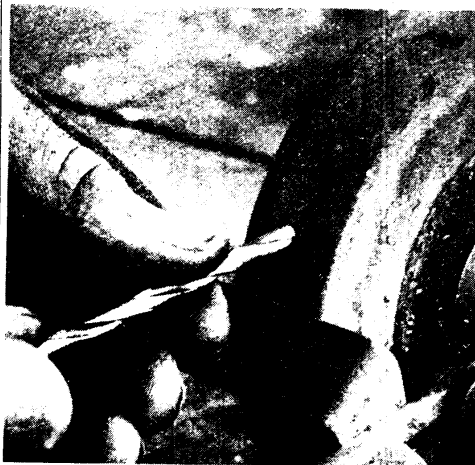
Drills are sharpened by grinding. Here the operator is seen applying the face of the cutting edge to the stone, the grinding being checked with the gauge shown in Fig. 6
